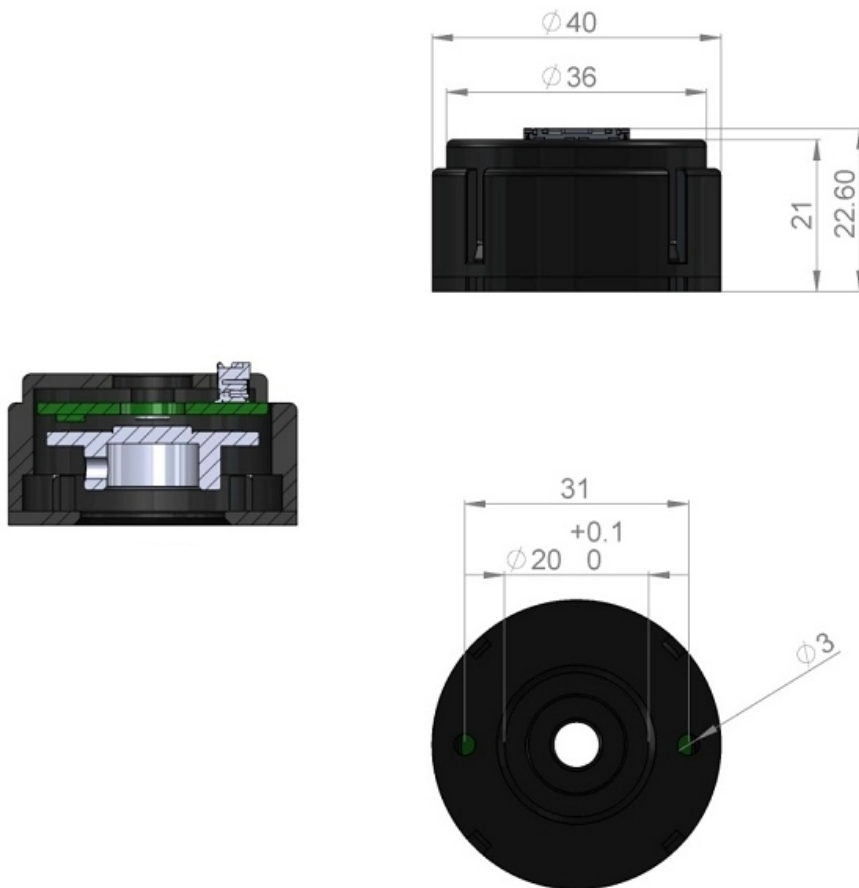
Bottom view, top view, side view, and cut view (units = mm)
